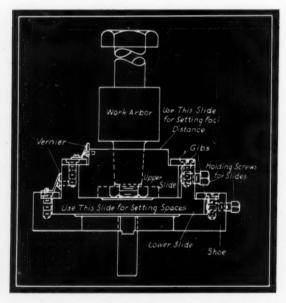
Special milling fixture is required to cut elliptical gear teeth
